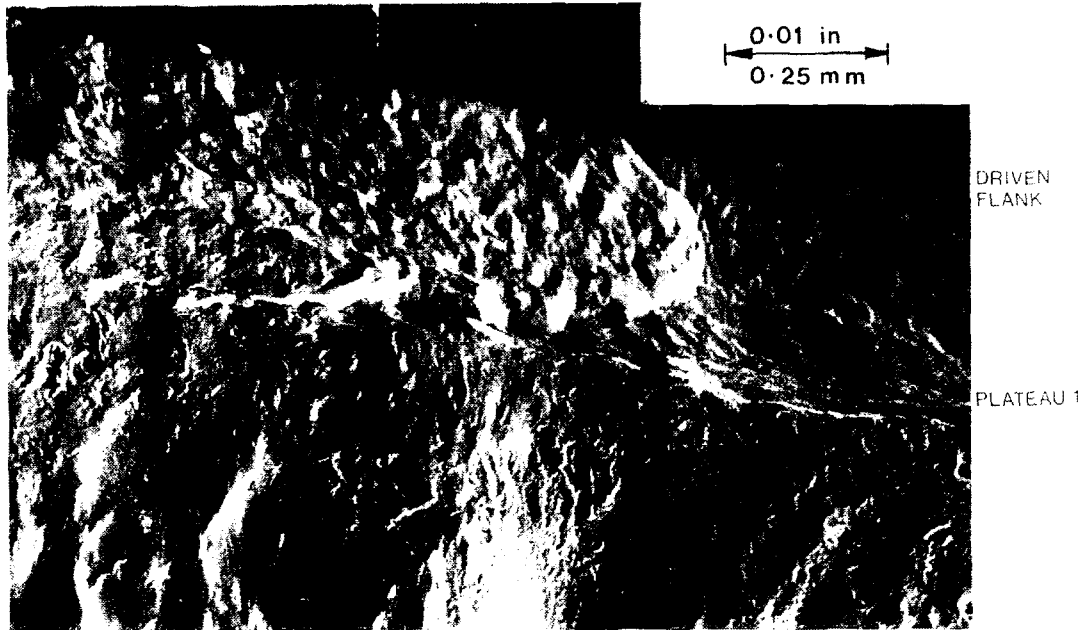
VIEW OF PLATEAU NO. 1 SHOWING CRACK ON FRACTURE FACE
